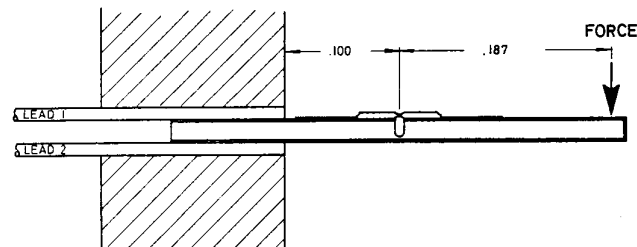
Conventional mounting and loading pattern for the Pixie.
